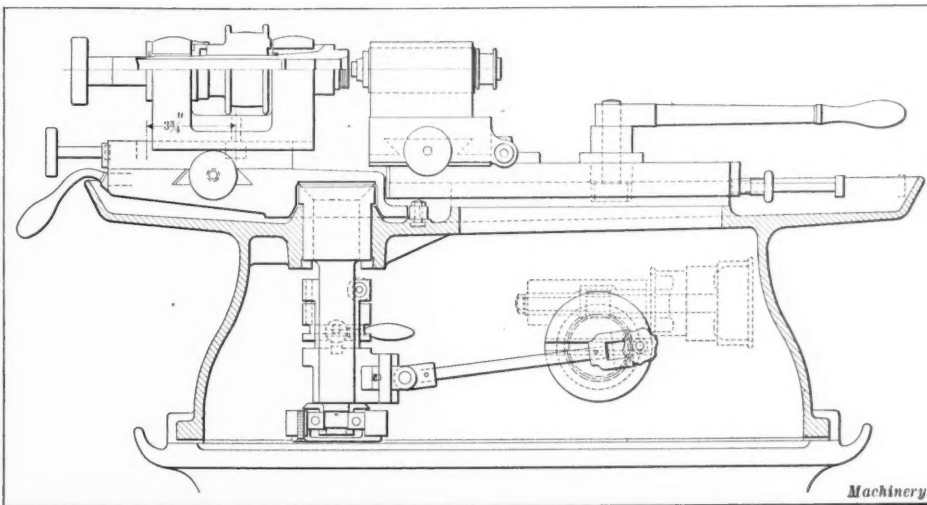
Partial Front Elevation of Machine shown in Fig. 1
